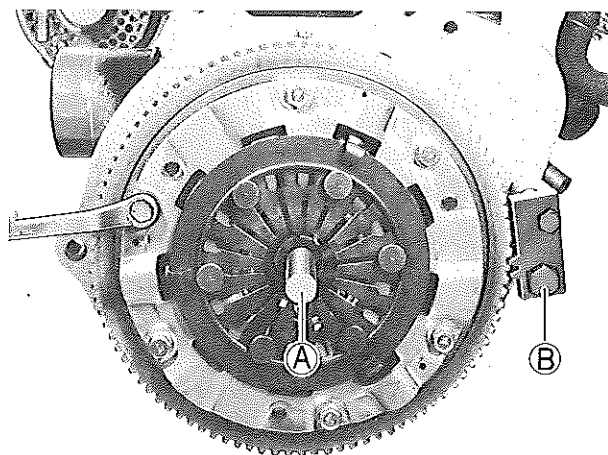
(B) Flywheel stopper (09916-97820)
